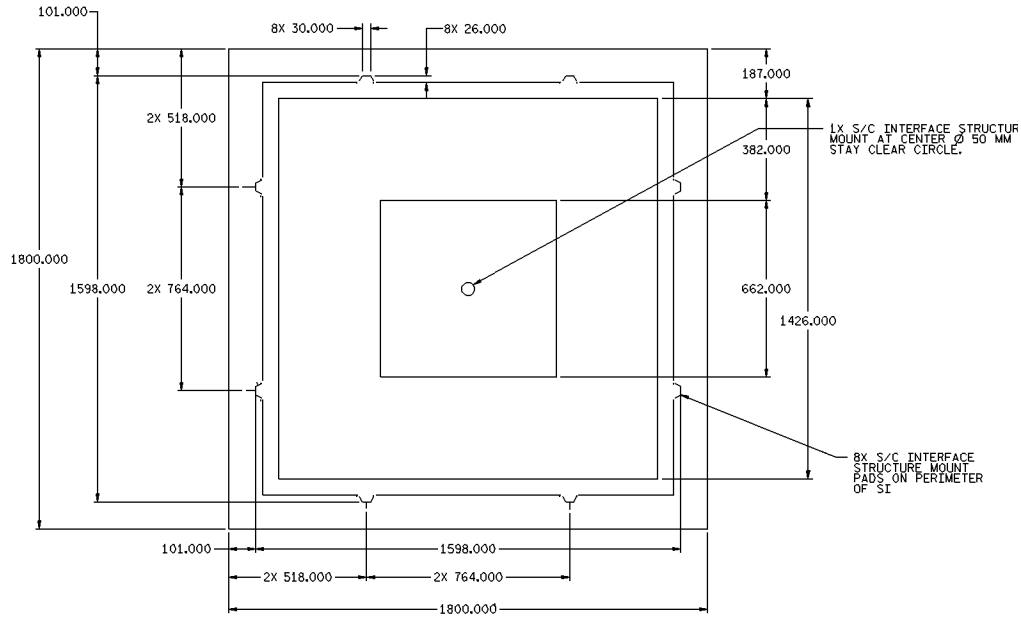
Bottom View of Primary SI (dimensions in mm)
